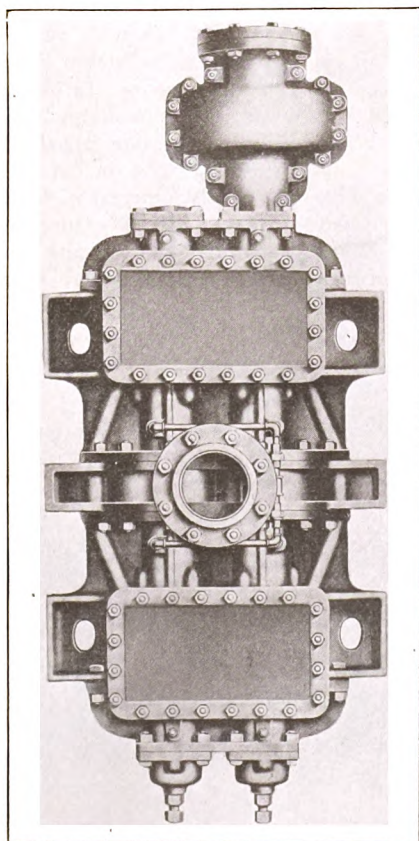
EXTERNAL VIEW OF SUBMERGED CARGO PUMP
